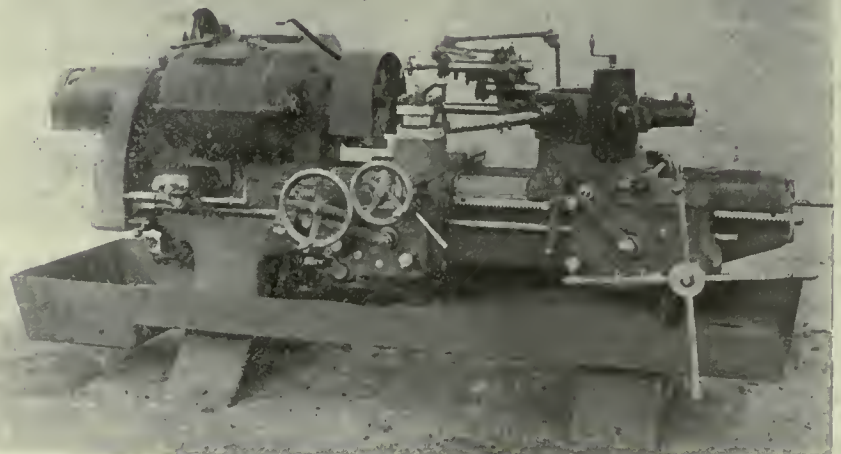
UNIVERSAL TURRET LATHE WITH CHUCKING EQUIPMENT
